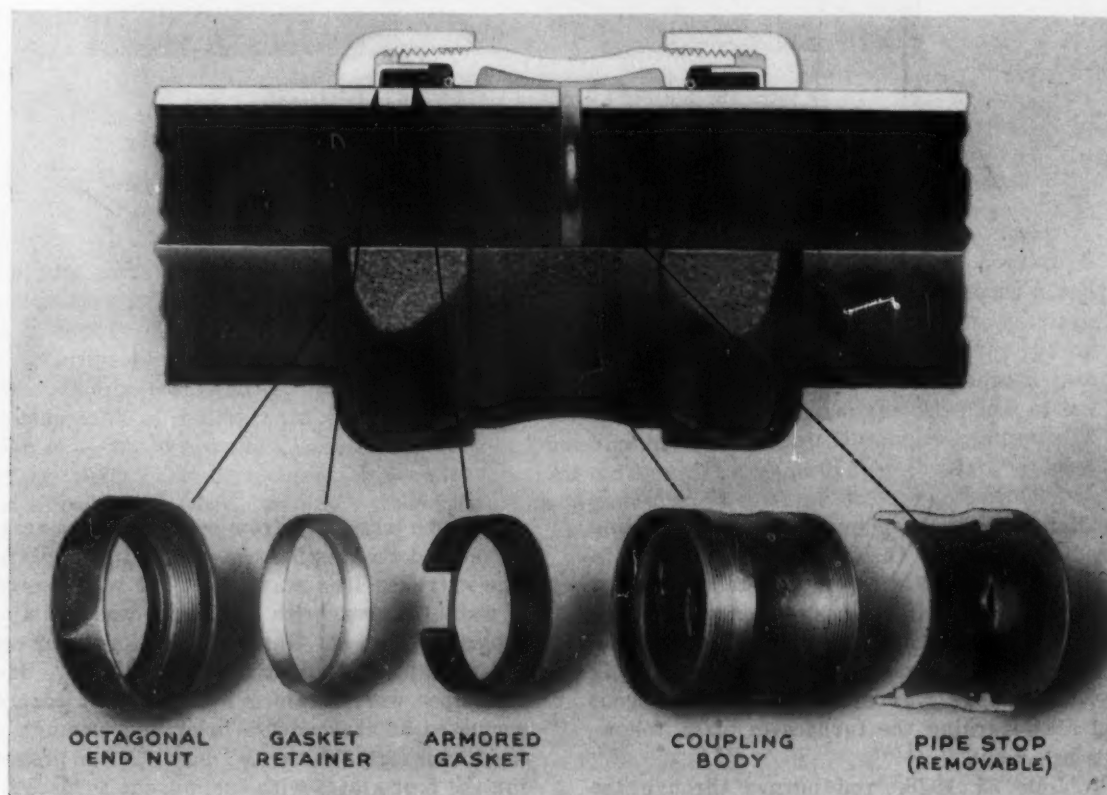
Cutaway section of a No-Thread coupling used for the furnace piping. The same parts are used in all fittings, with bodies of the required type.
